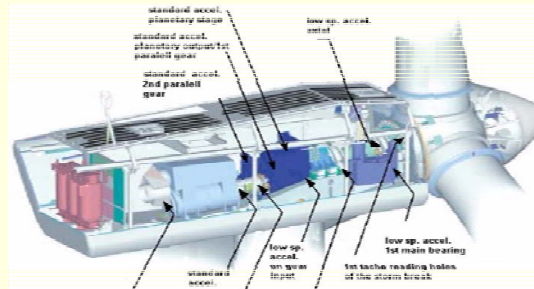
Nacelle Vestas V90.3 MW\_Note: 1= oil cooler; 2 = generator cooler; 3 = transformer; 4 = ultrasonic axial sensor; 5 = VME; 6=processor; 7 = servo motor; 8 = generator; 9 = compass; 10 = coupling; 11 = gear; 12 = gear; 13 = parking brake; 14 = machine foundation; 15 = blade bearing; 16 = blade hub; 17 = pitch cylinder; 18 = hub controller. (Reproduced by permission of Vestas Wind Systems A/S, Denmark)
